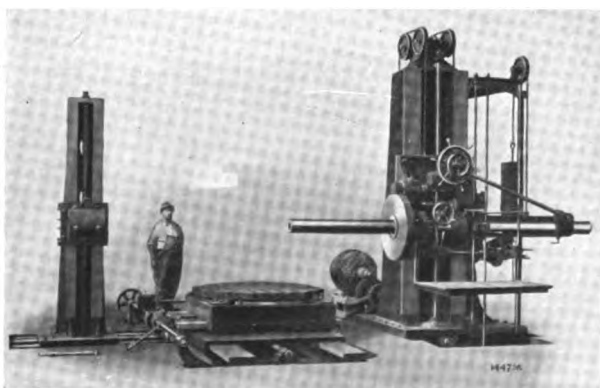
Horizontal Boring, Drilling and Milling Machine with Fixed Column and Cross Feeding Table
